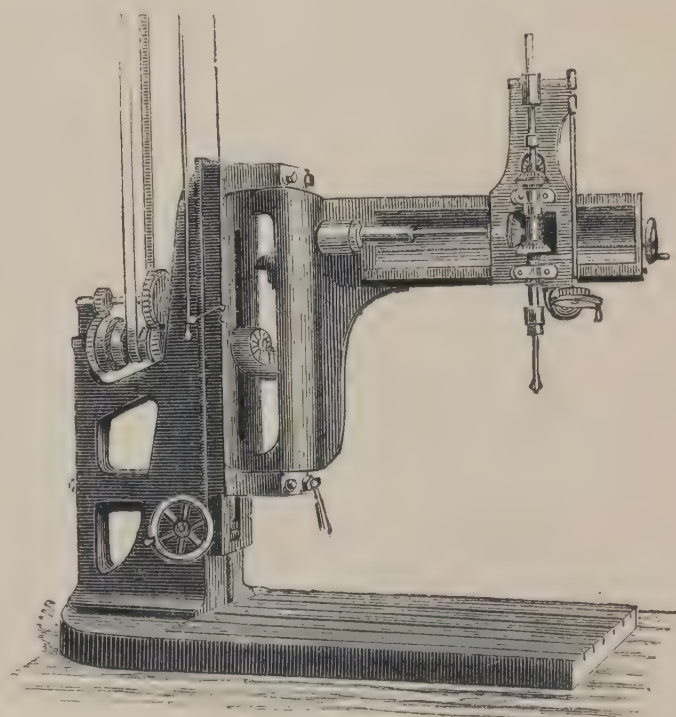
SELF-ACTING RADIAL DRILLING MACHINE.
